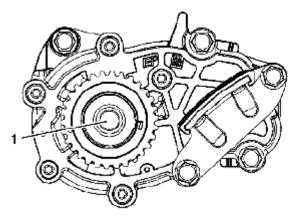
Identifying Special Tool EN 48383-3 Courtesy of SUZUKI OF AMERICA CORP.
